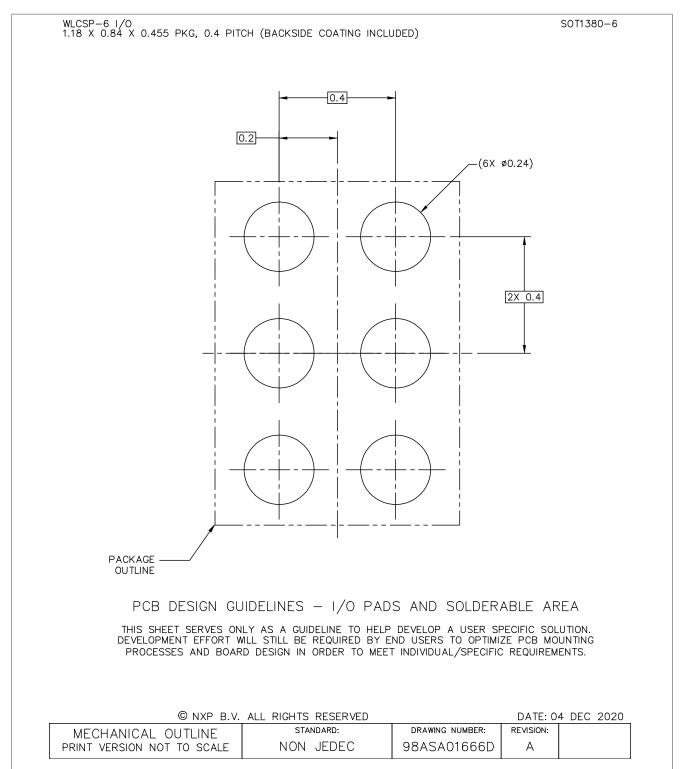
SOT1380-6 (WLCSP6) I/O pads and solderable area
